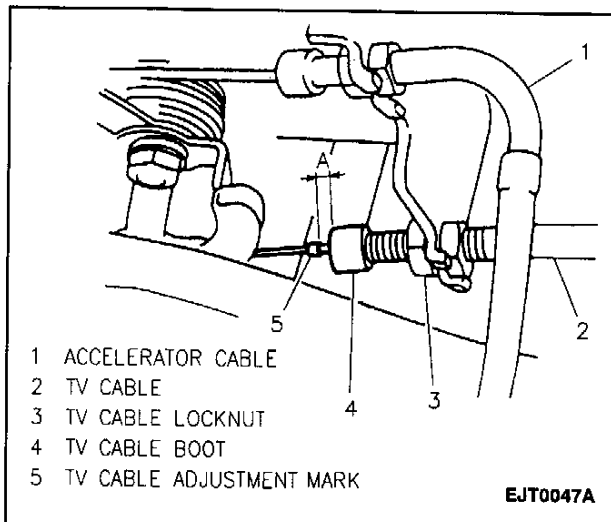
TV Cable at Throttle Body (03-72LE, 4-Speed)
